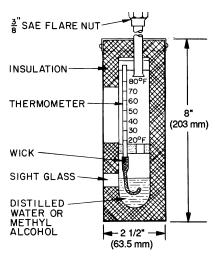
Typical Wet-Bulb Type Vacuum Indicator
